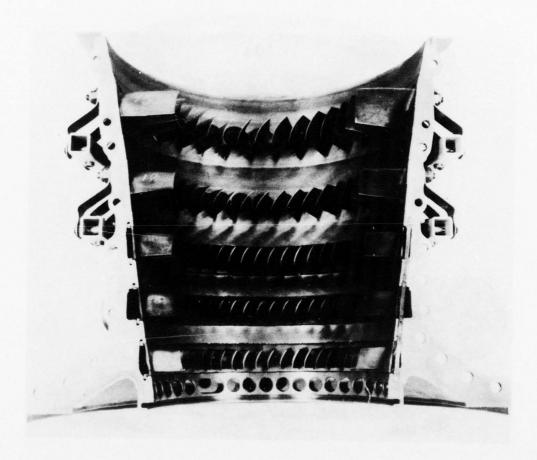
Assembled Casing After Engine Testing - Inner Contour
